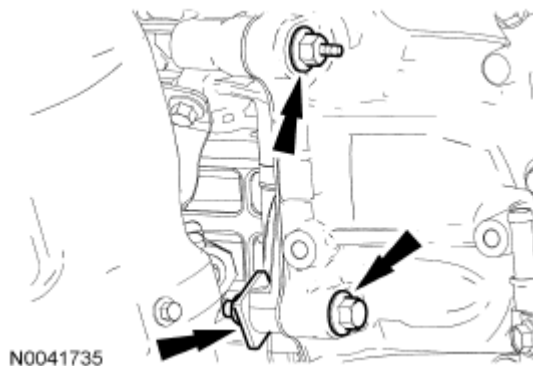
Locating Transaxle-To-Engine Stud Bolt, Bolt And Nut
